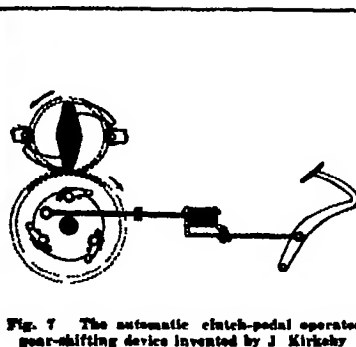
The automatic clutch-pedal operated gear-shifting device invented by J Kirksey
